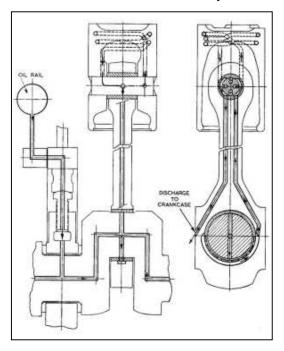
Traditional Lubrication System (Courtesy of marinediesels.co.uk at http://www.marinediesels.info/Basics/lubrication\_system.htm)
